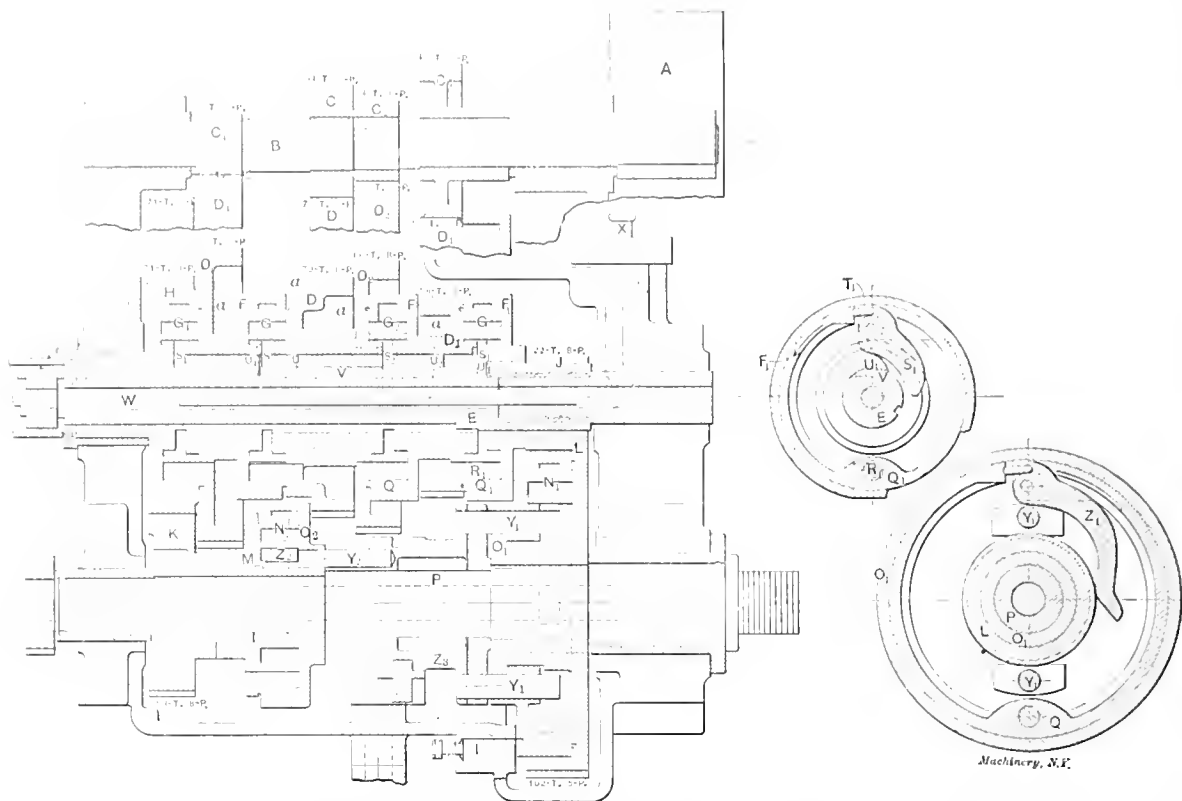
Head-stock Spindle for Whitcomb-Blaisdell Lathe showing the Gearing, and the Positive-action Friction Clutches which control the Speed Changes.
